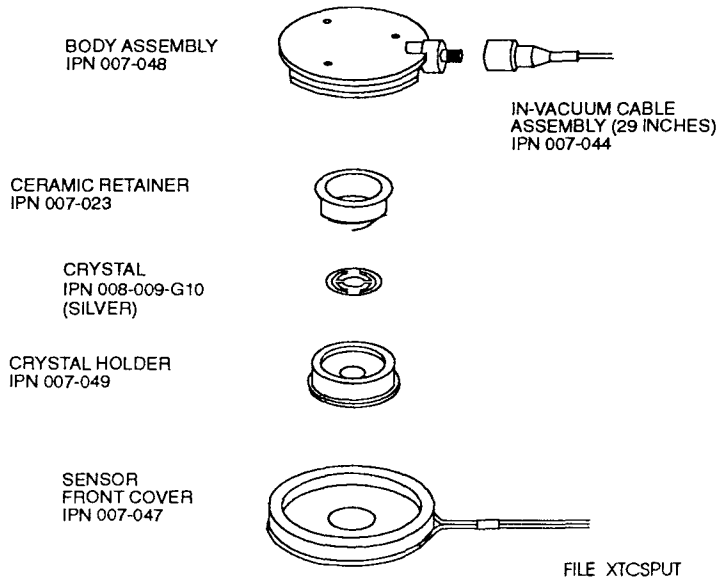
Sputtering Crystal Sensor (Exploded)
